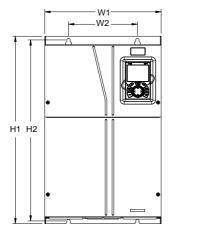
Outline and mounting dimensions of 380V 90–110kW VFD models
